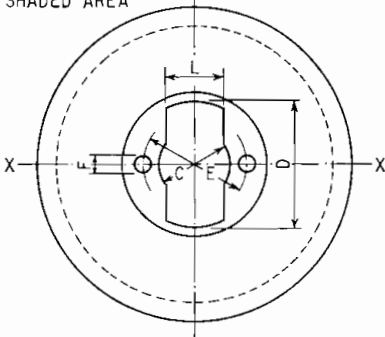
gives the main dimensions of an adapter to enable the machine fitting of Figure 3 to receive the hub of Figure 2.
